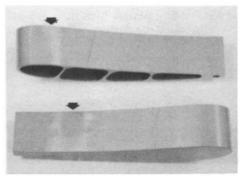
Two views of a milling defect on an unsupported vertical flange in a 7075-T651 aluminum plate. Courtesy of McDannell Douglas Conada, Ltd.
